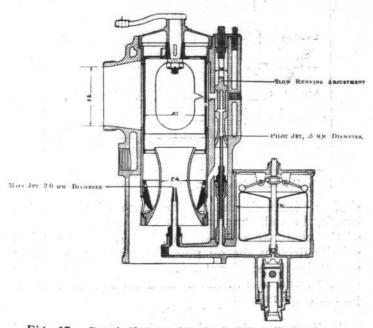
Semi-diagrammatic section through one of the carburettors.
